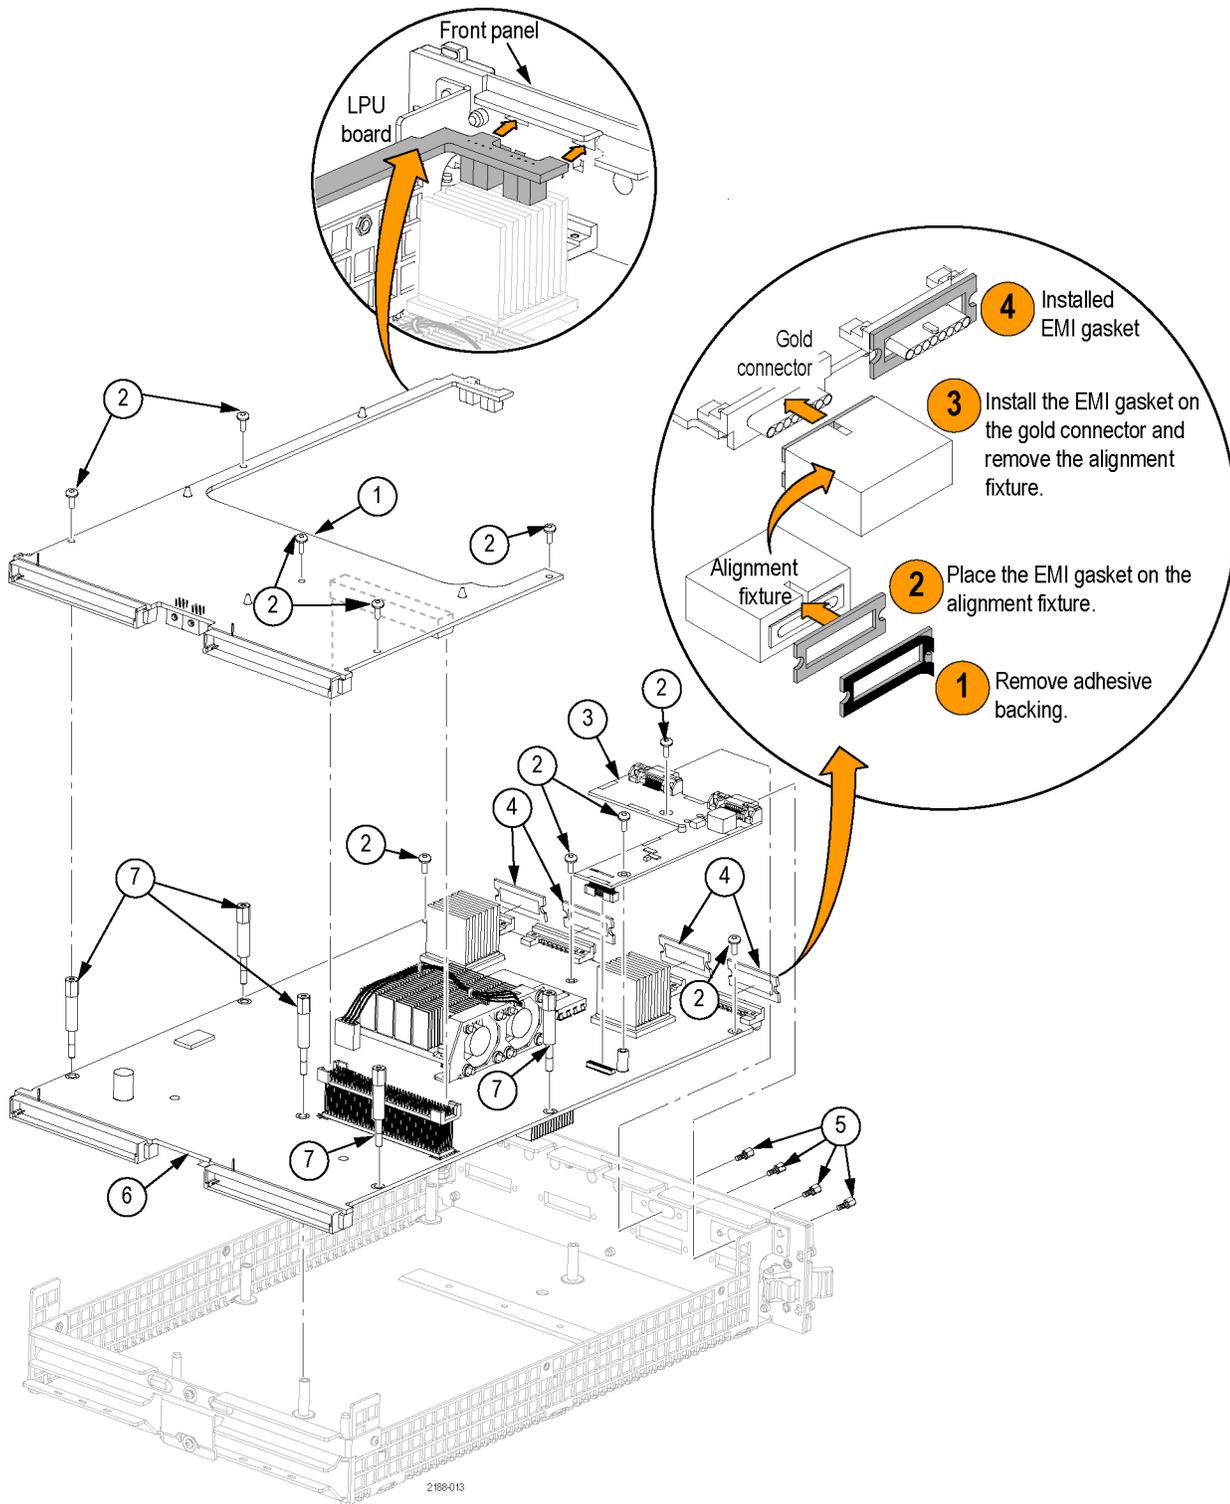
TLA7S08 & TLA7S16 circuit board assemblies
